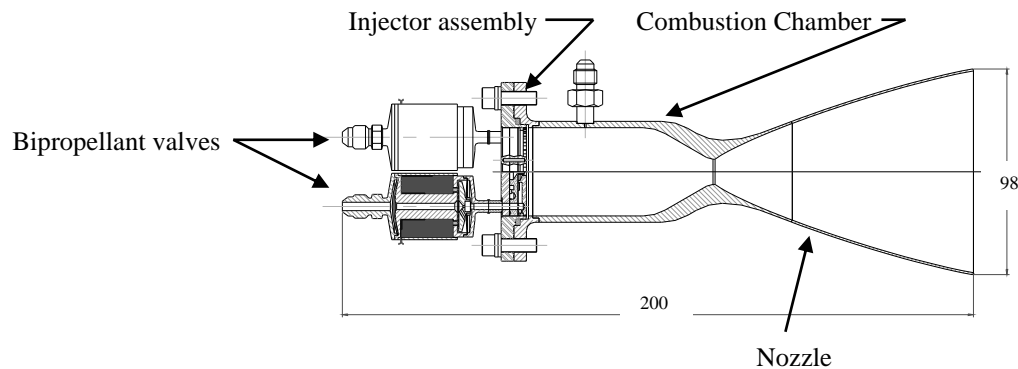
Bipropellant thruster utilized in the tests (dimensions in mm).
